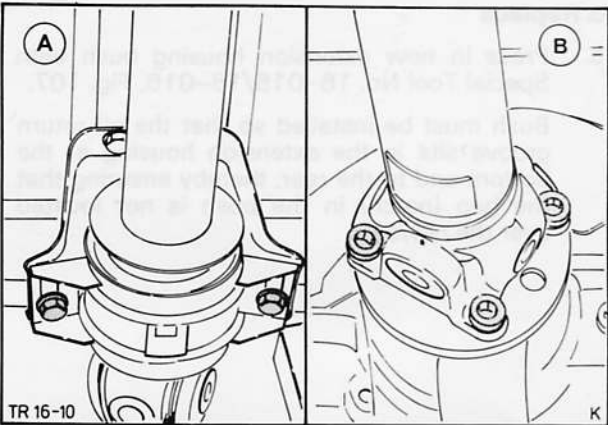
Driveshaft mountings – rear axle flange and centre bearing
